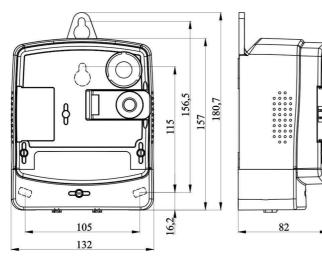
Overall and fixing dimensions of a meter fitted with a short terminal cover
